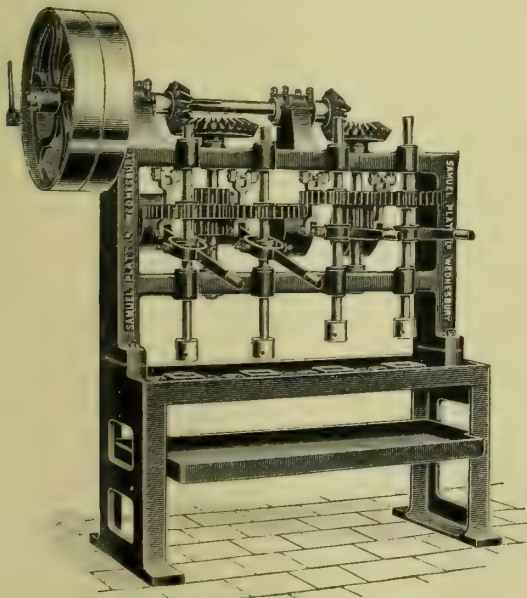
4-SPINDLE NUT-TAPPING MACHINE. MESSRS. SAMUEL PLATT, LTD., WEDNESBURY.
